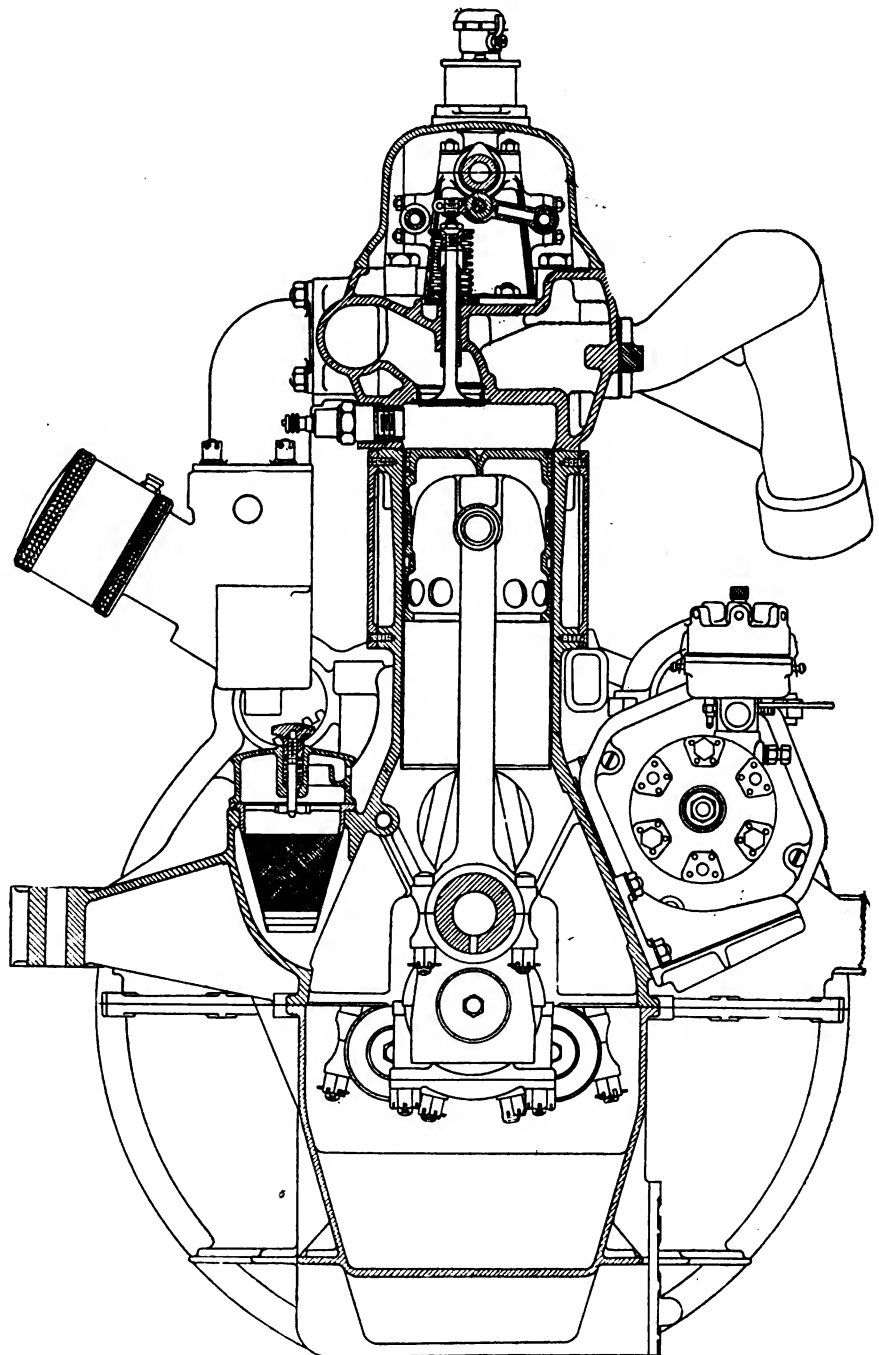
Section across motor, indicating overhead valves and camshaft, also cylinder liner, and disposition of accessory units
